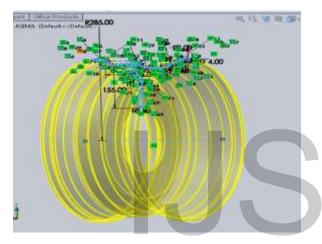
A revolved 3D preview of the design wheel in solidworks
